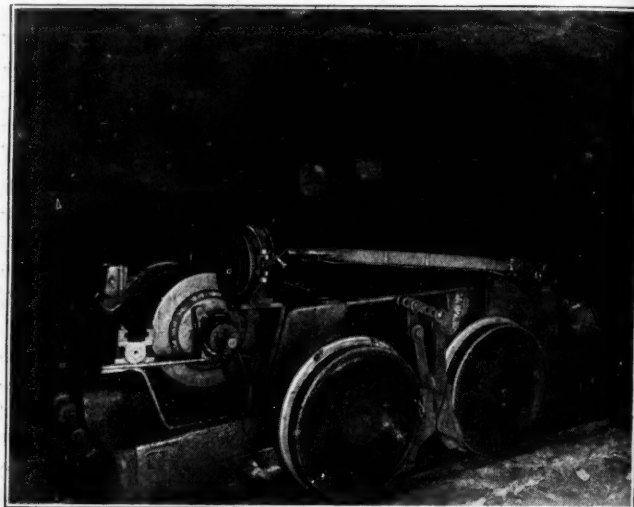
CAST-IRON LOCOMOTIVE REPAIRED BY WELDING
